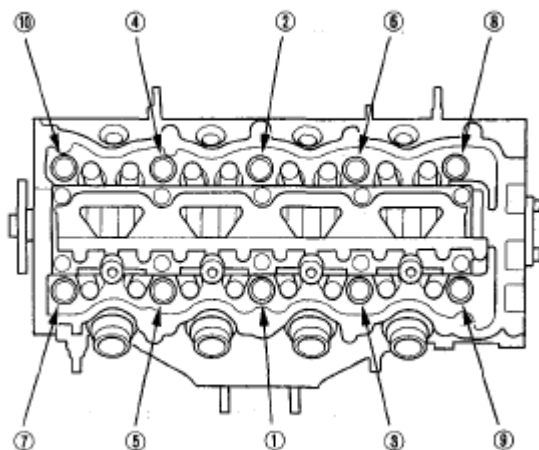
Identifying Tightening Sequence Of Cylinder Head Bolts
